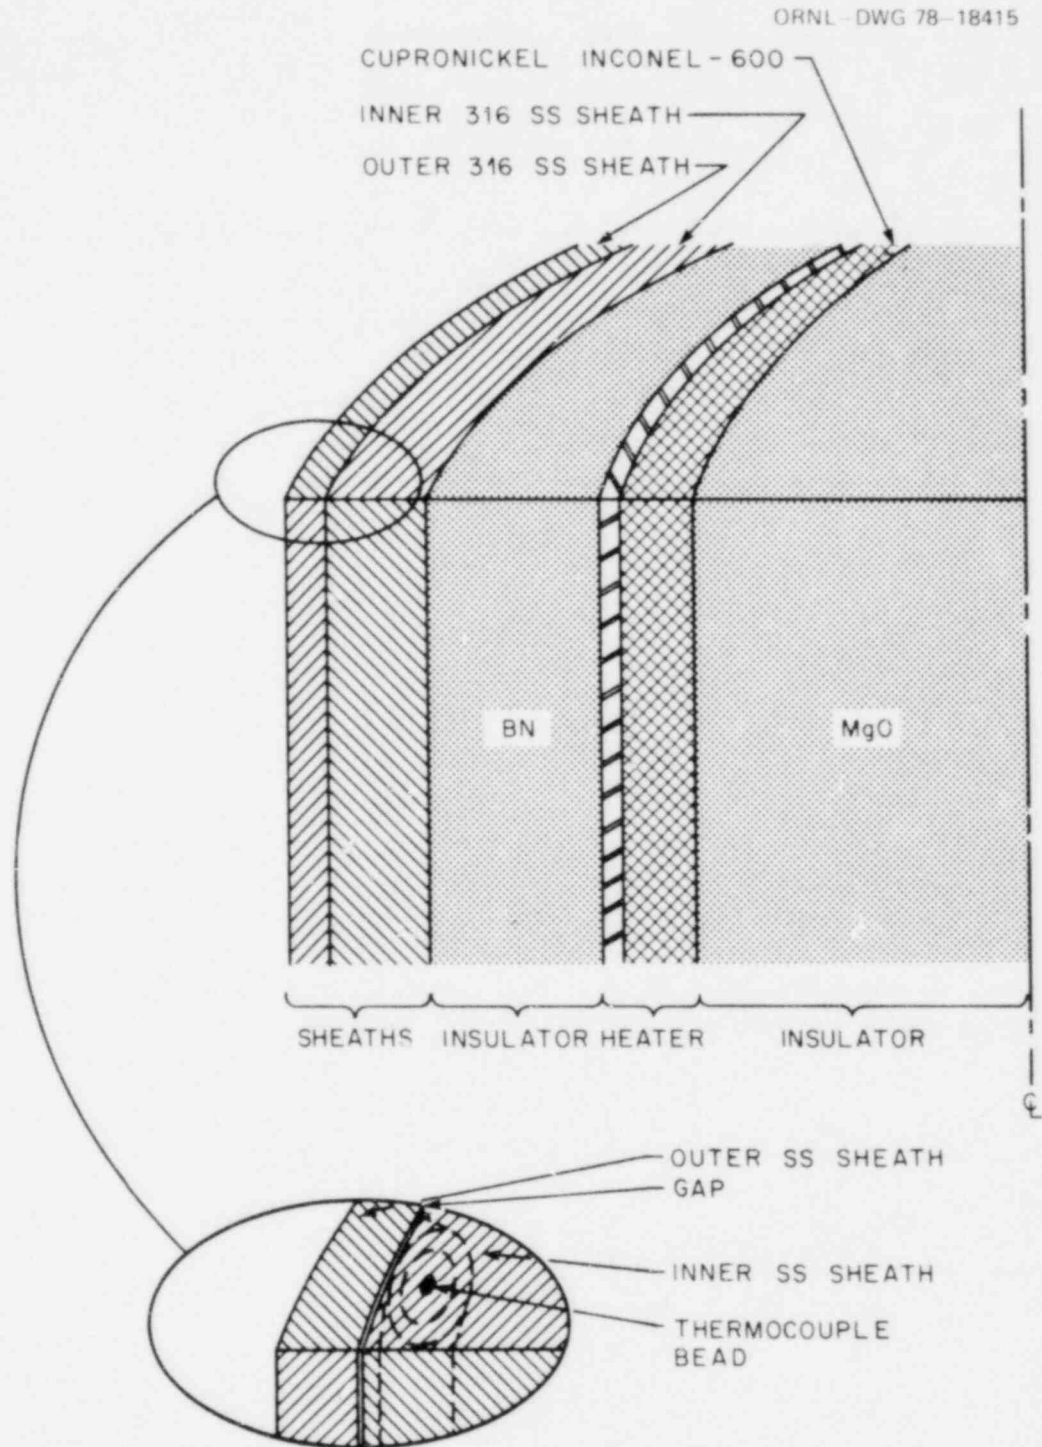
Schematic of fuel pin simulator with inset showing thermocouple and groove superimposed on solid inner stainless steel sheath.
